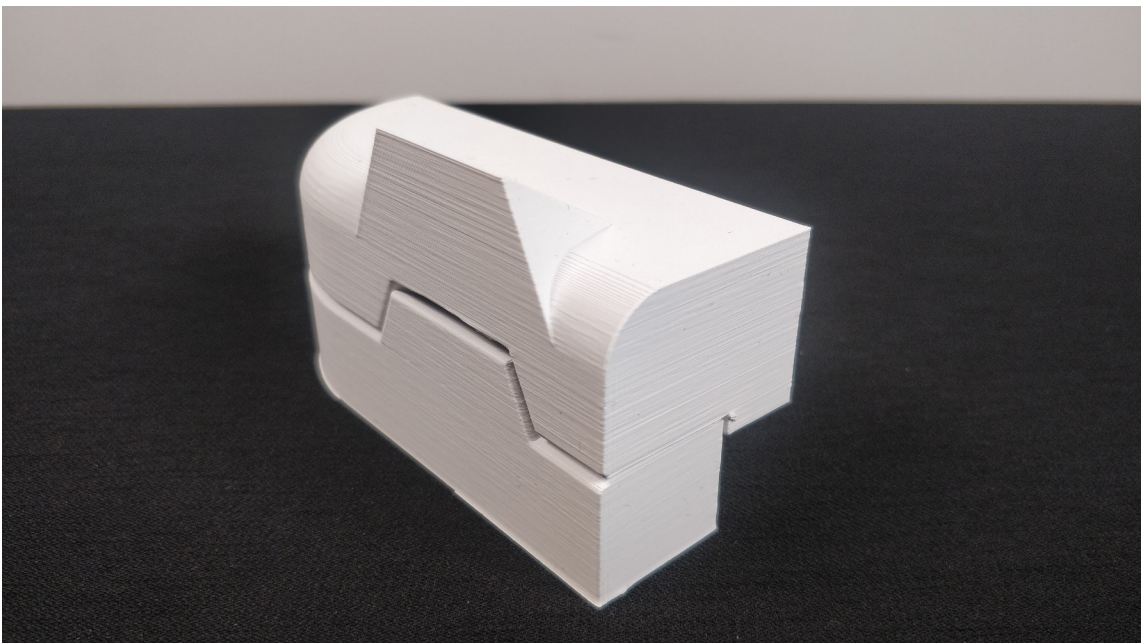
3D PRINTED PIECES OF LID AND BOX STACKED ON TOP OF EACH OTHER
